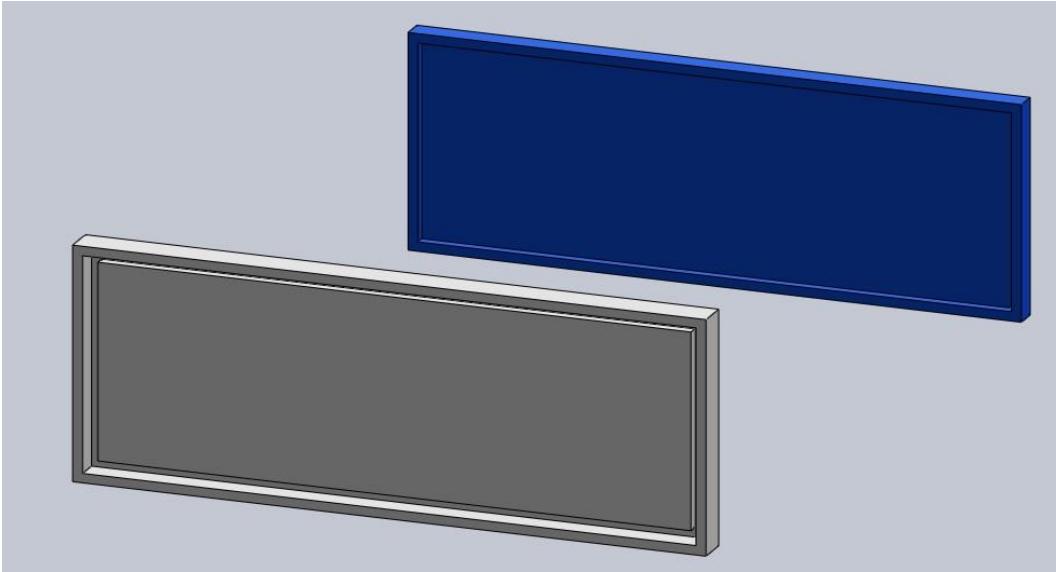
Drawing on the left shows ABS mold and drawing on the right shows silicone mold solidworks drawings.
